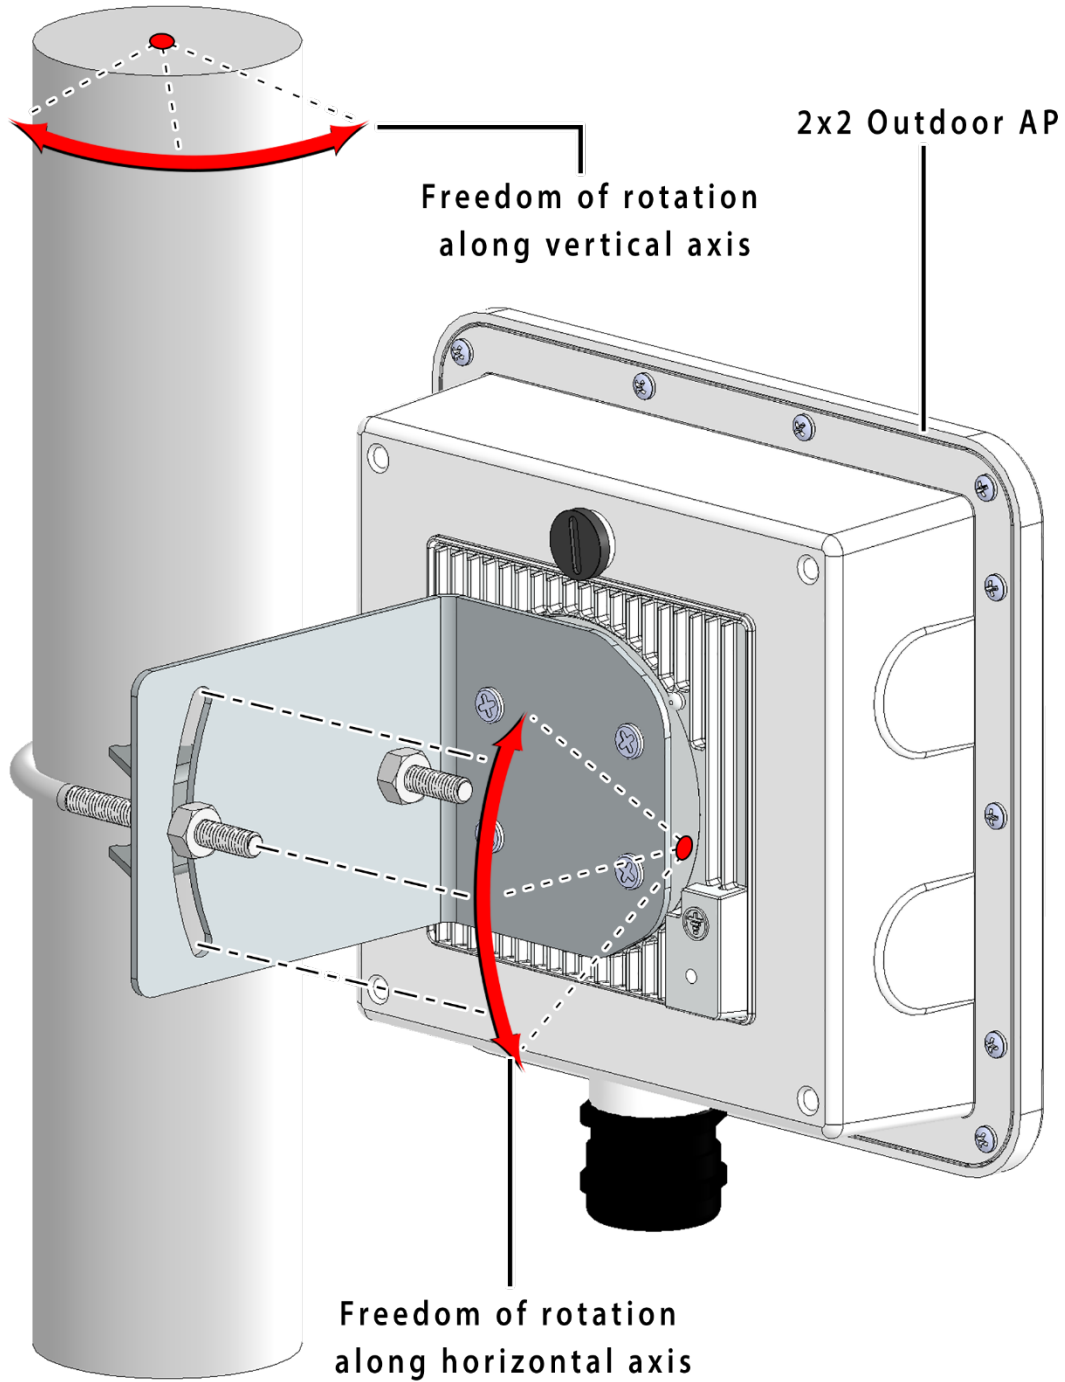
Final alignment of 2x2 outdoor AP and mounting bracket
